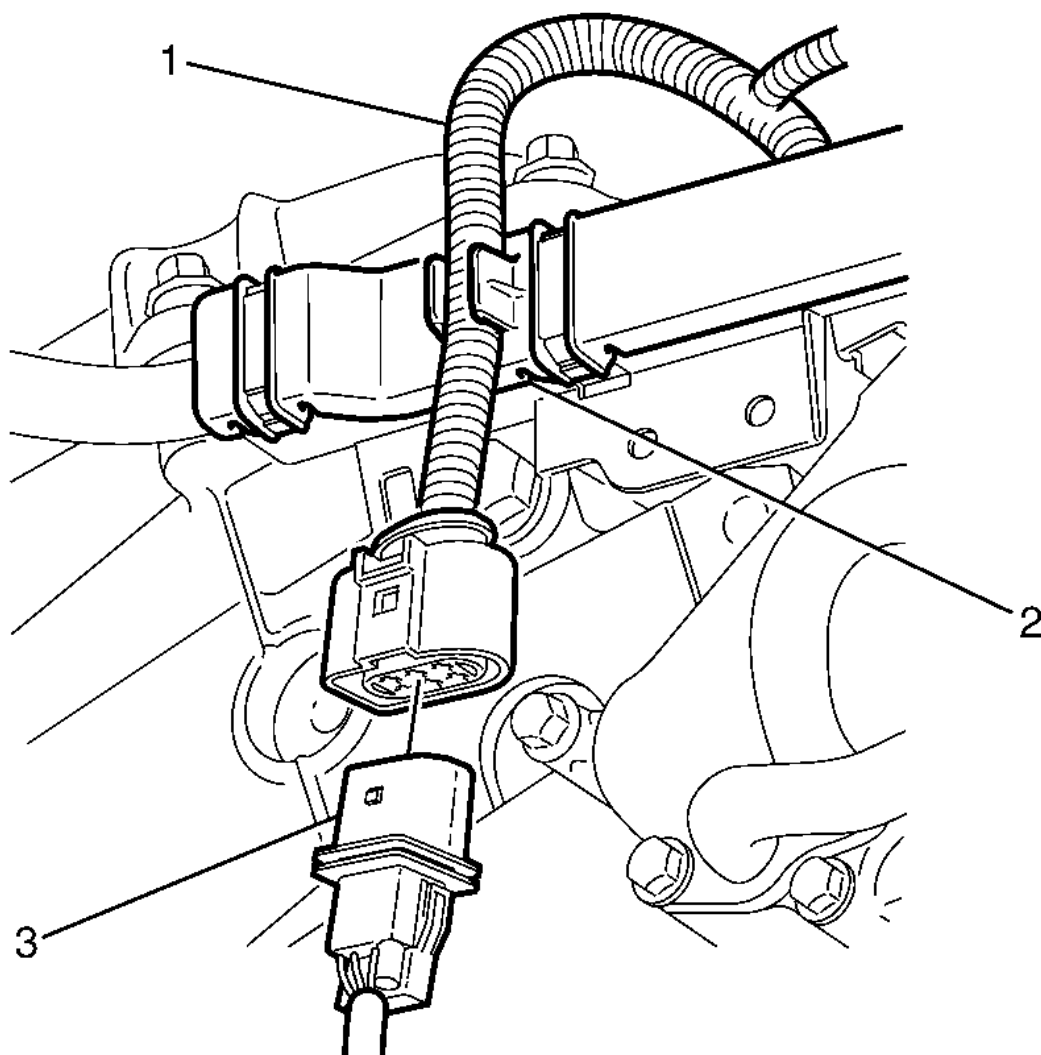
View Of Right Hand Heated Oxygen Sensor 1 & Main Transmission Electrical Connectors
